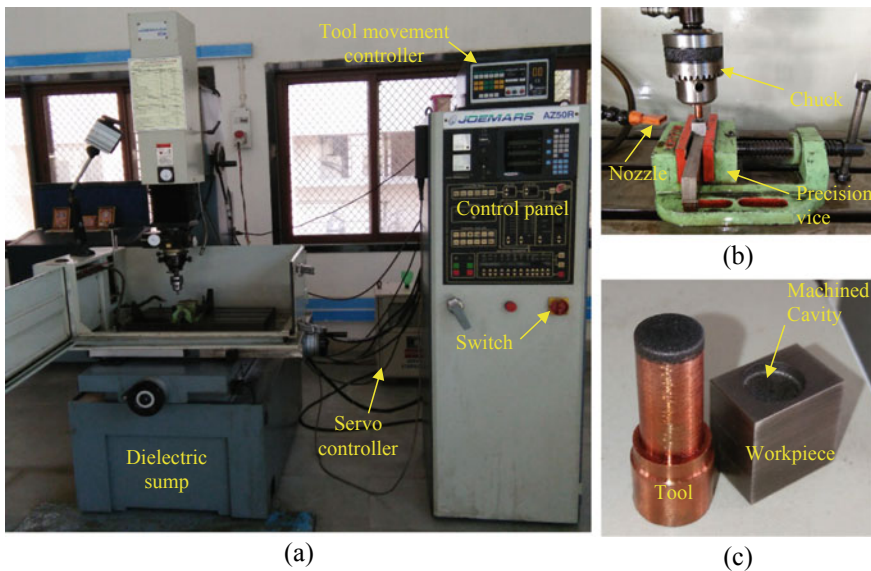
a Experimental setup; b tool and workpiece settings; c tool and workpiece after machining
